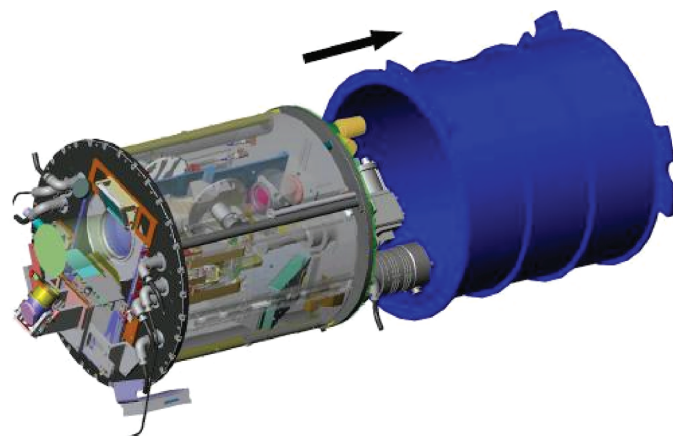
Removing the cylindrical shell of the cryostat allows easy access to all internal components.
